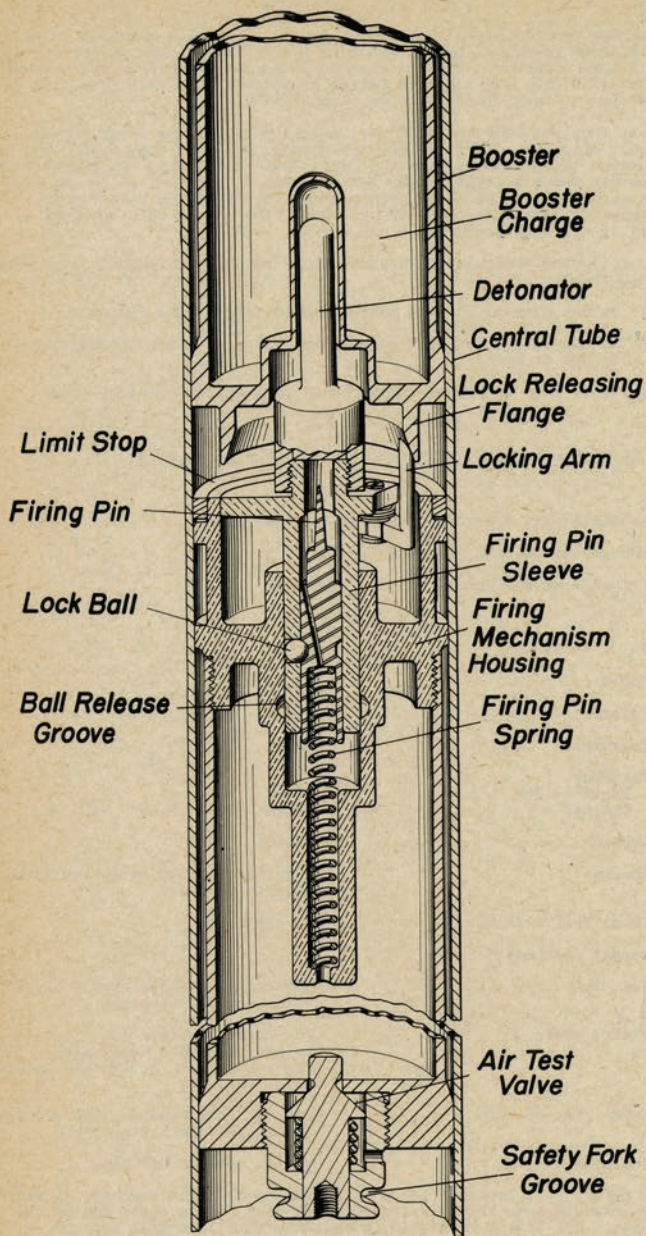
Type 95 Depth Charge Pistol, Sectional View
